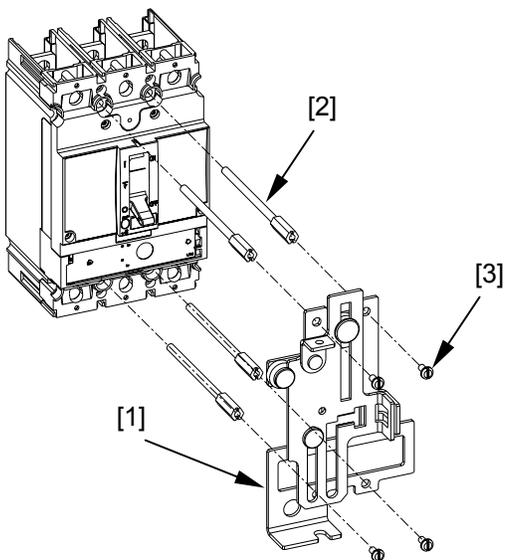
Installing the circuit breaker operating mechanism on FE breaker.
